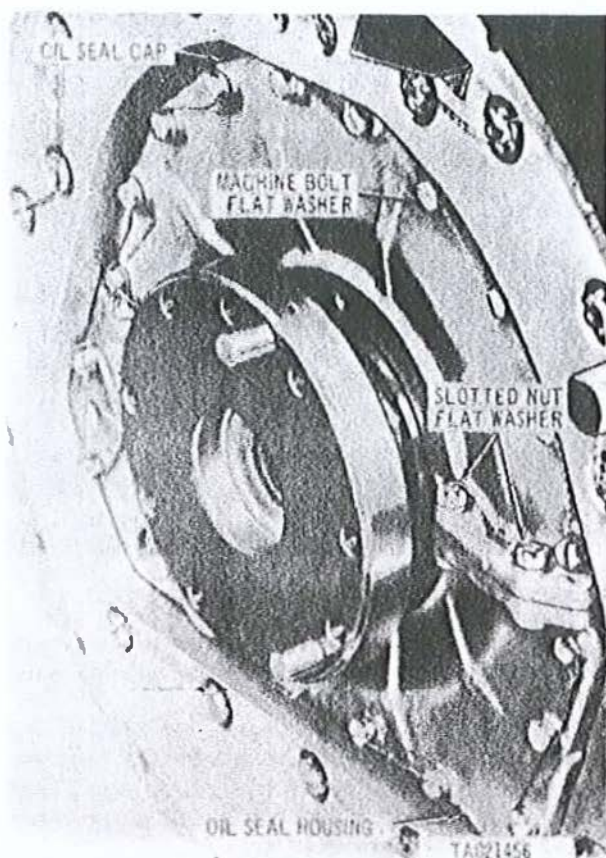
Removing or installing oil seal cap and oil seal housing mounting bolts.
